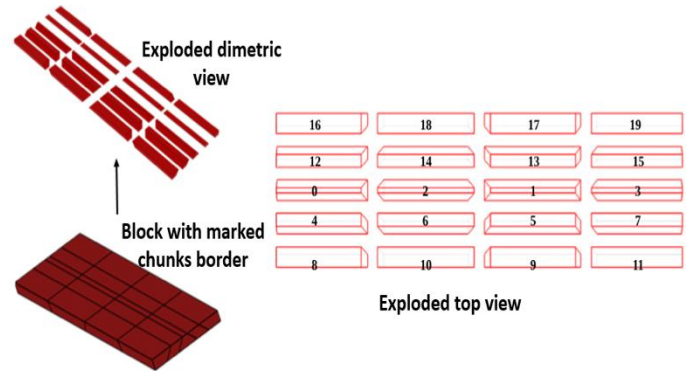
Rectangular block showing the chunks line, exploded view of the chunks that combine to make a rectangular block and top view of exploded chunks with chunk number marked
